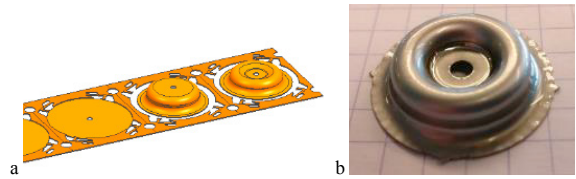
The strip layout of the demonstrator process (a) and its empirical end result (b).
